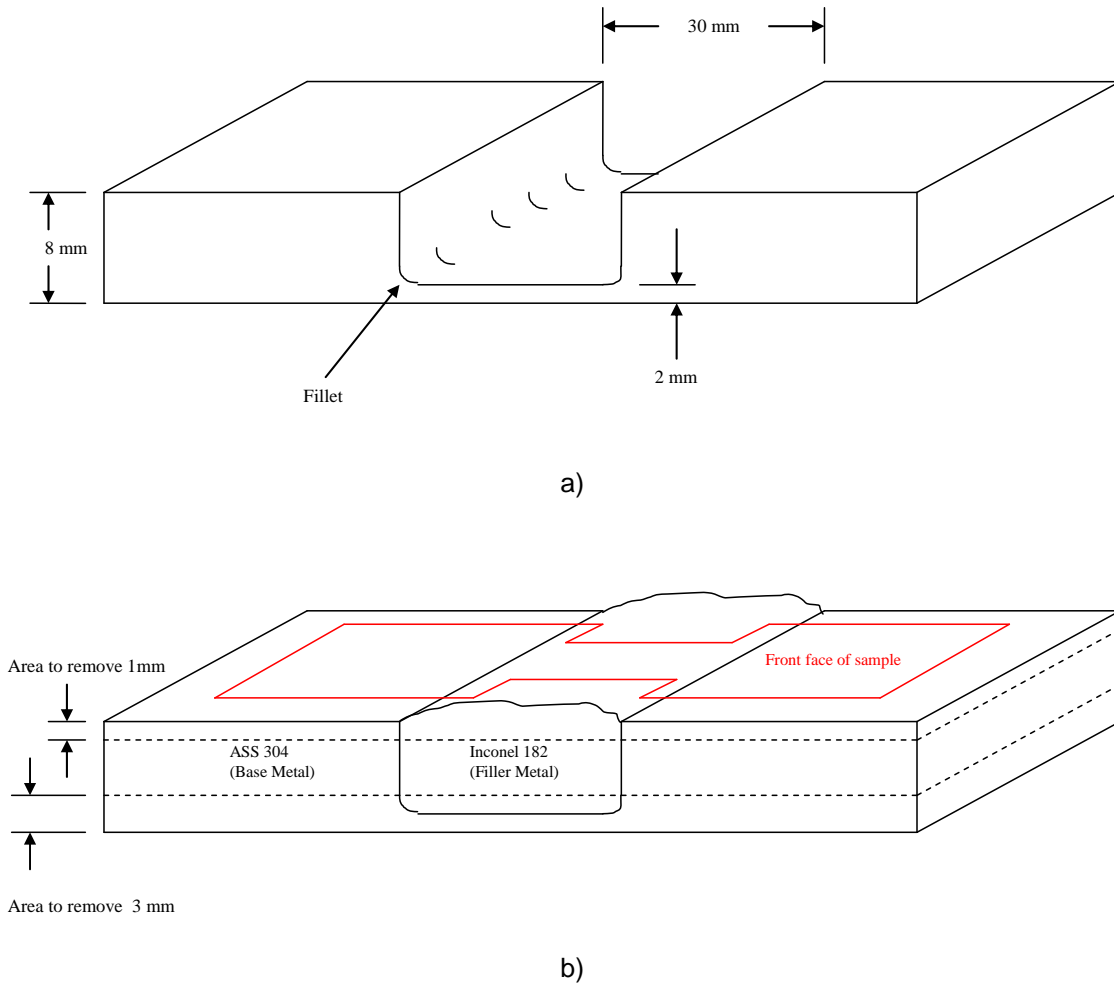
a) Schematic view of the groove in AISI 304 steel plate. b) Schematic view of the plate after welding, and cutting of the tensile test sample.
